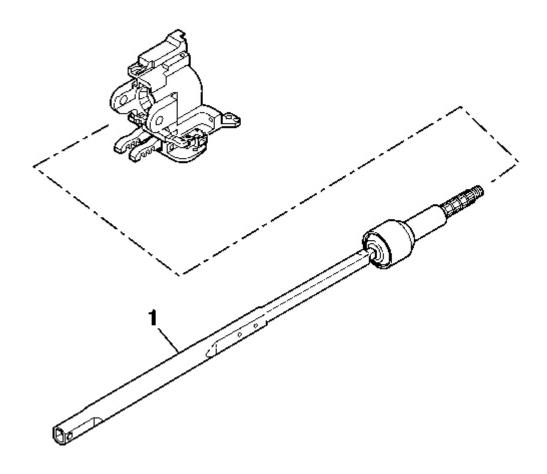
Identifying Steering Shaft Courtesy of GENERAL MOTORS CORP.
